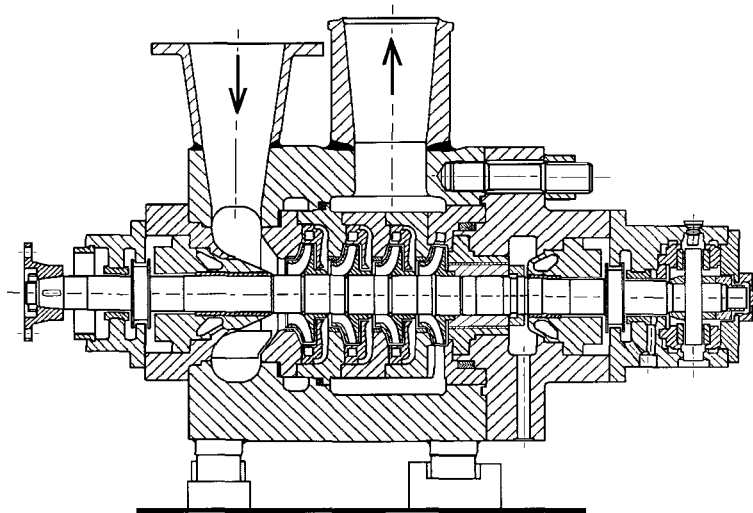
Boiler feed water pumps have small radial clearances at impeller rings, balance drum, end seals and bearings.
